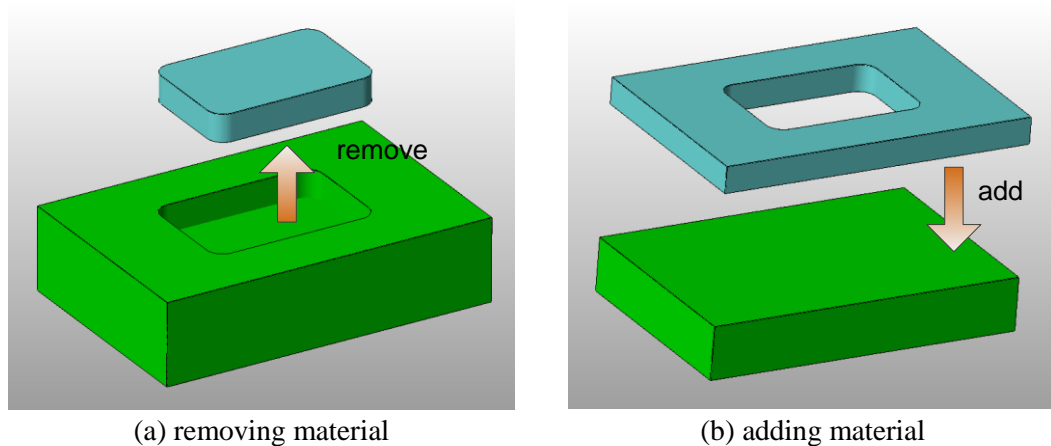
Two ways of manufacturing a pocket (a) by CNC machining; (b) by FFF
